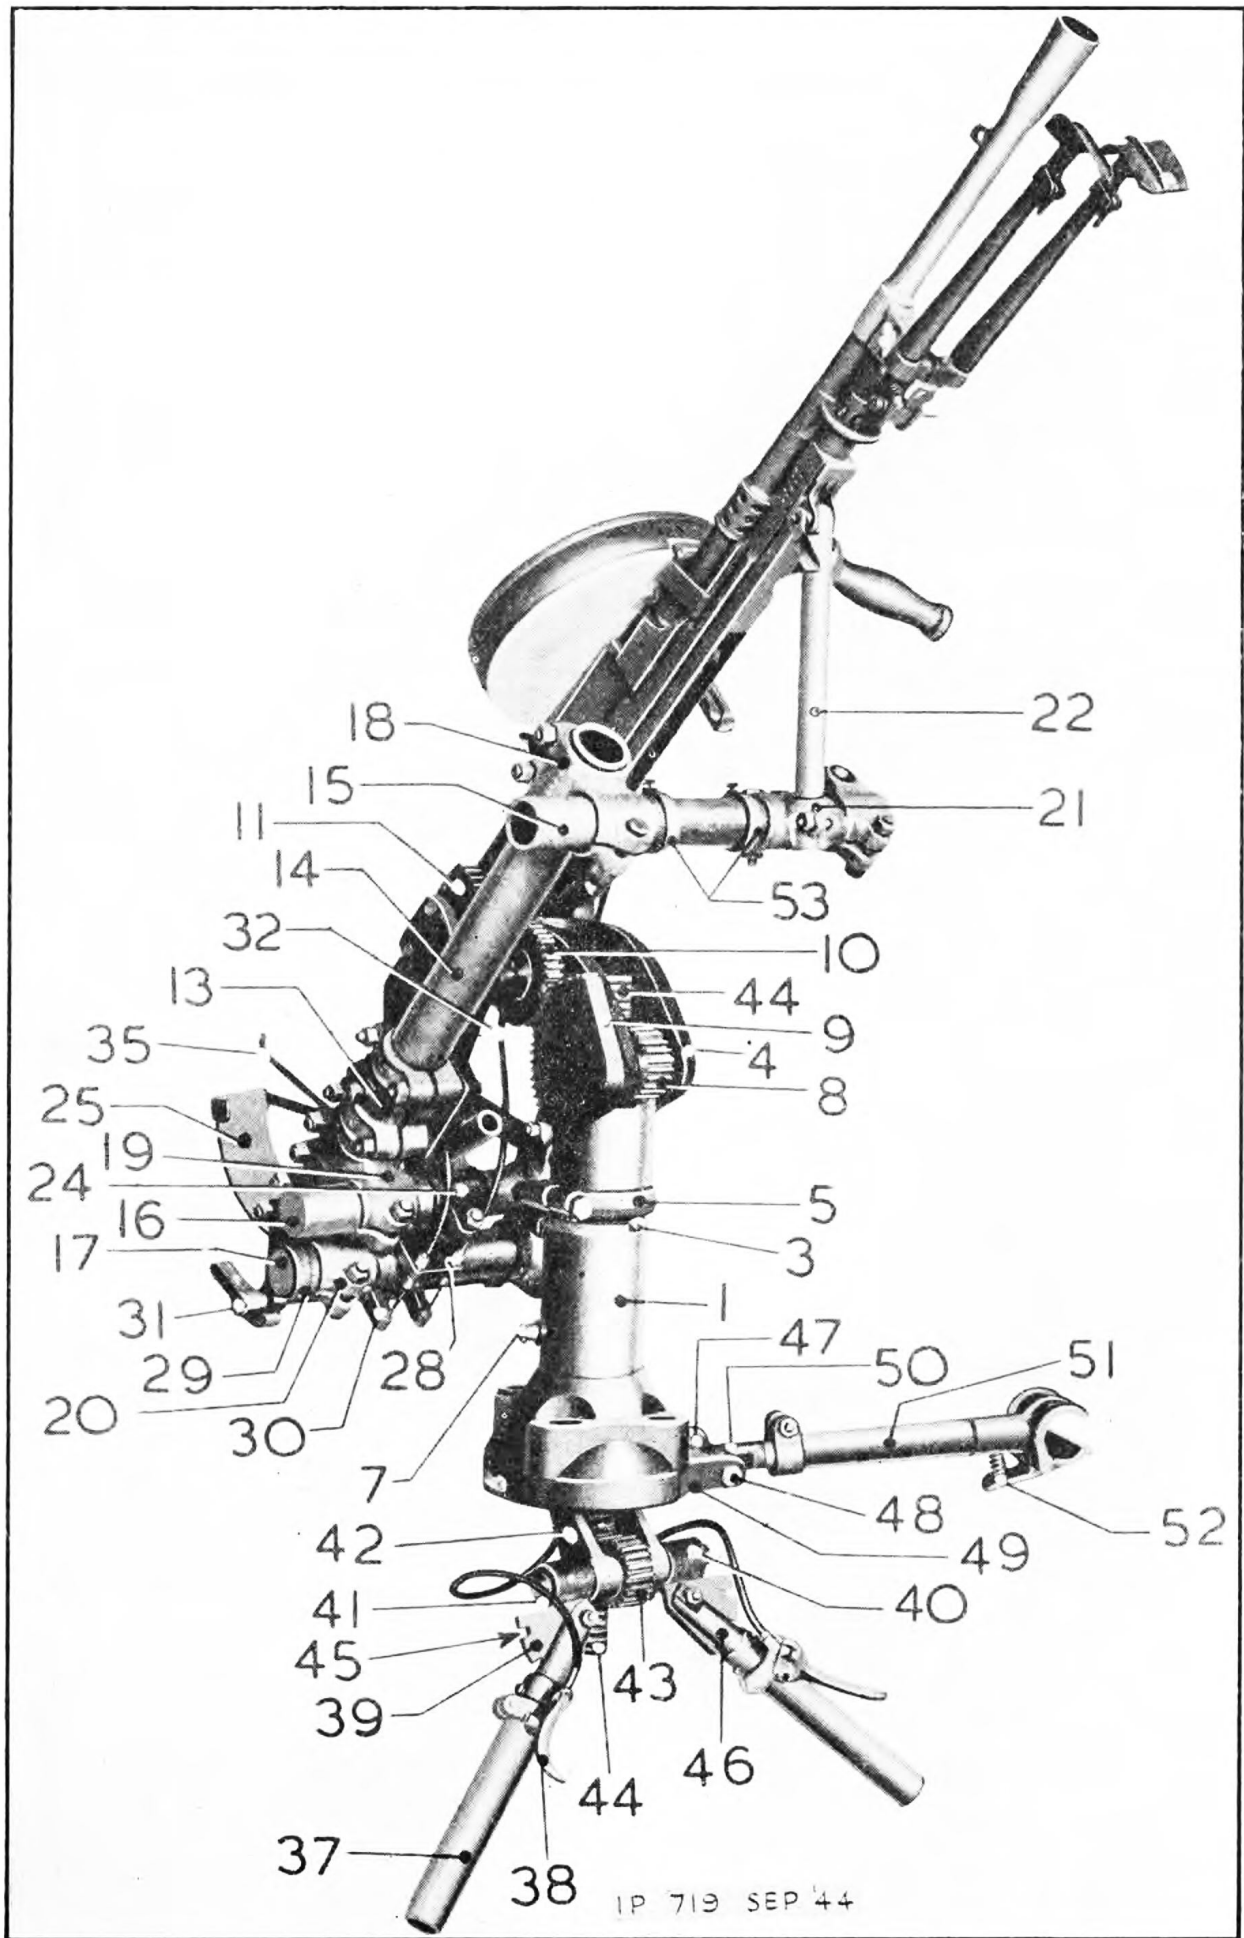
FRONT VIEW OF P.L.M. MOUNTING.
